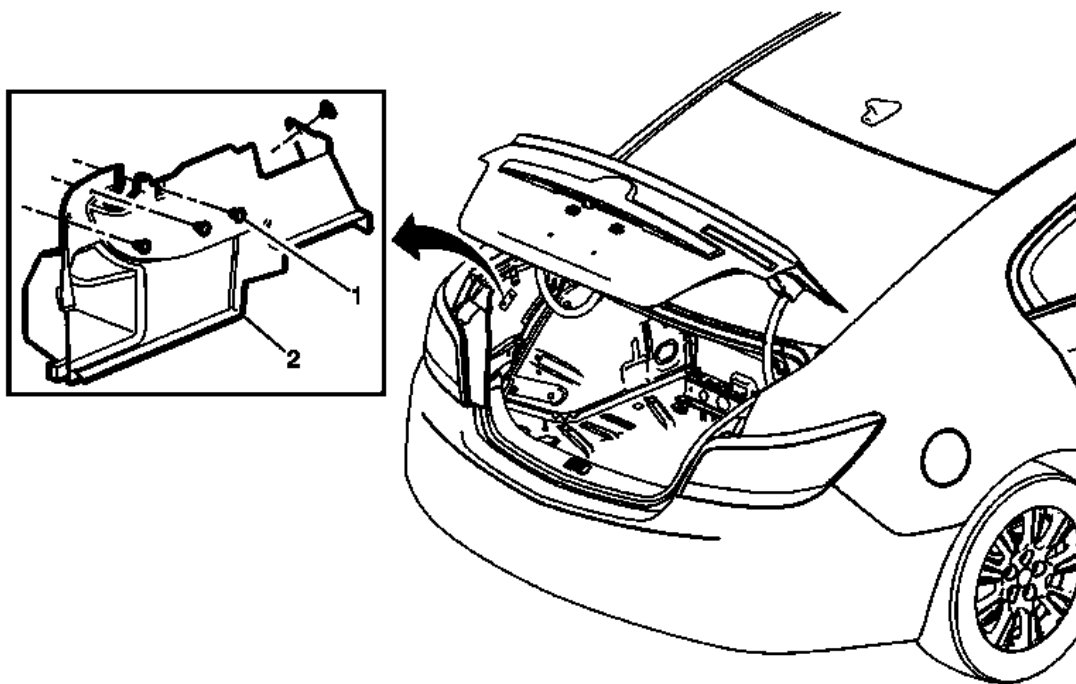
Rear Compartment Side Trim Panel (HP6, Left Side)
